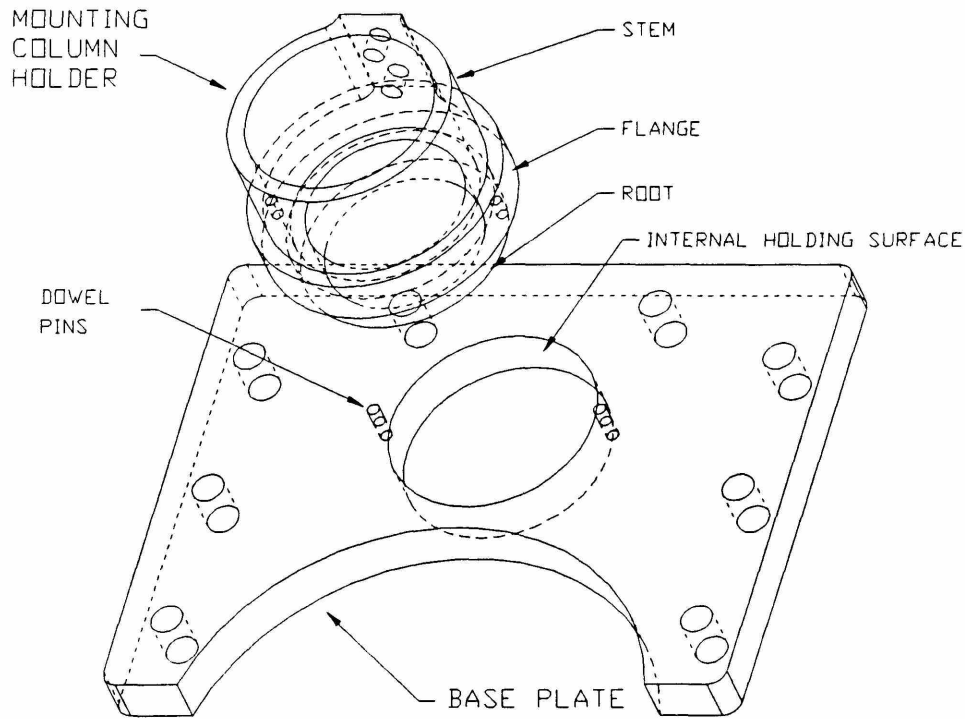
Mounting Column Holder and Mounting Base Plate
